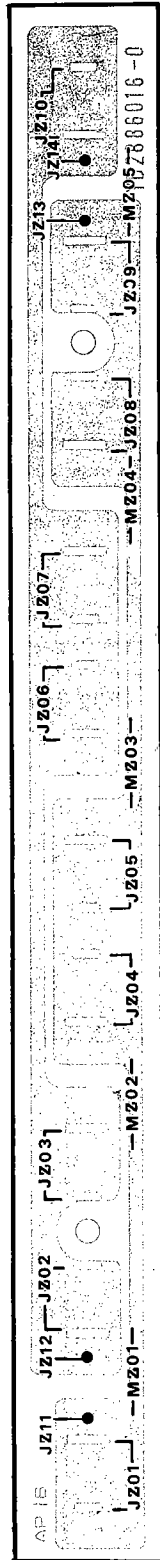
Dial Lamp Assembly PZ01 Component Locations
